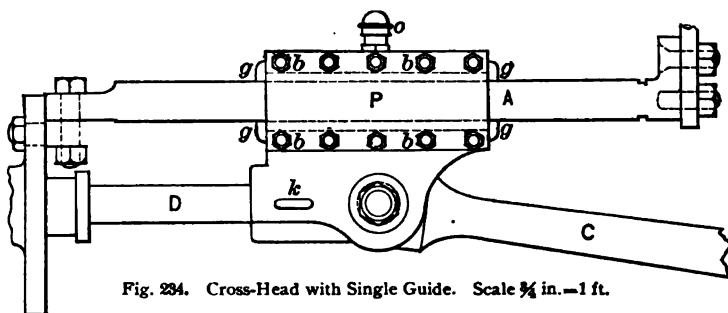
Cross-Head with Single Guide. Scale  $\frac{3}{4}$  in. = 1 ft.
